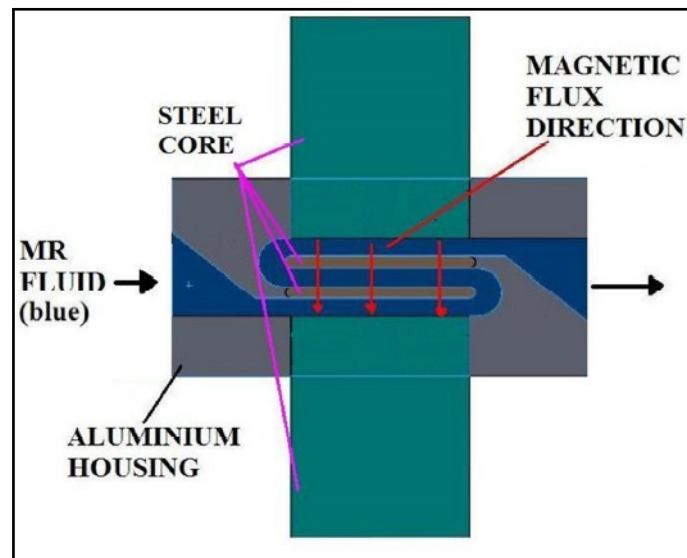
Section view of MR Valve Layout ([Meeser, 2014](#))
